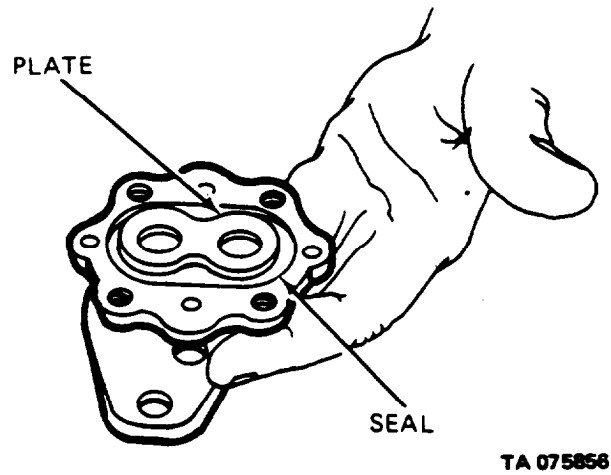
Remove/Install Lower Case Plate and Seal.
